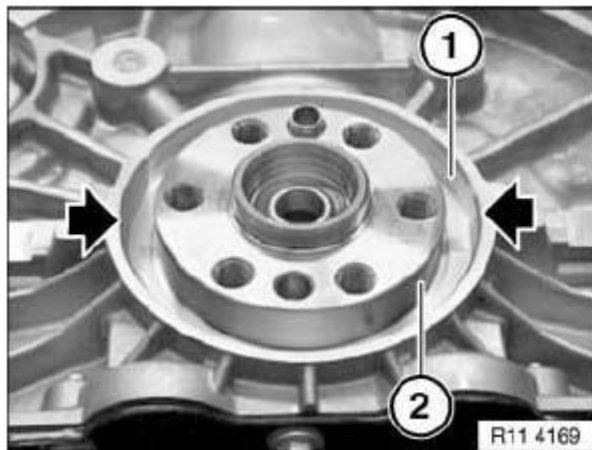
Identifying Radial Shaft Sealing And Running Surface
